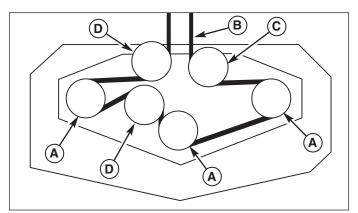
Mower PTO Belt Routing A. Spindle Pulley
